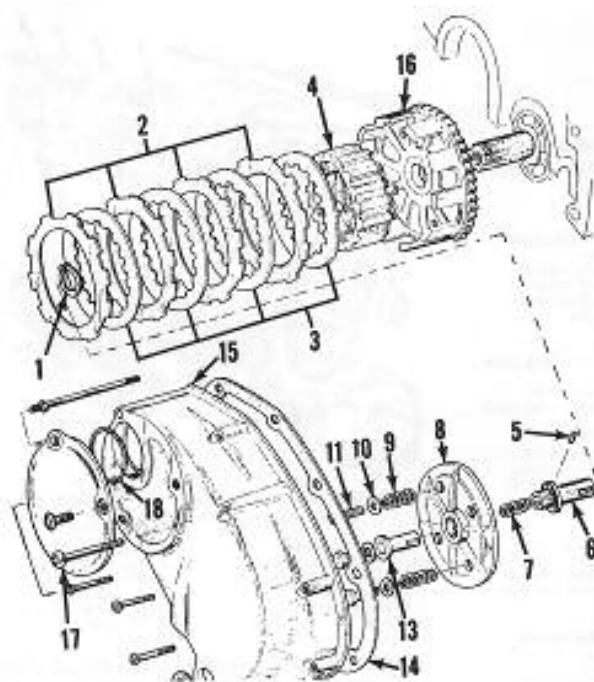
Exploded view of multiple disc wet clutch assembly used on C and CA models. Four friction discs (2) are used on 250cc models, five are used on 305cc models.
